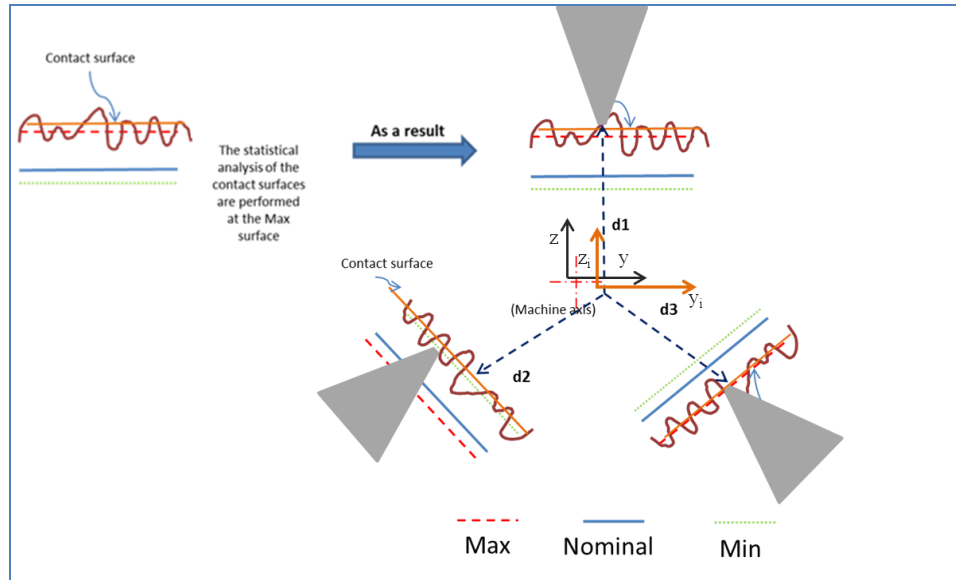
2D Contact Surfaces across the 3-jaw Chuck with respect to the Machine Axis
